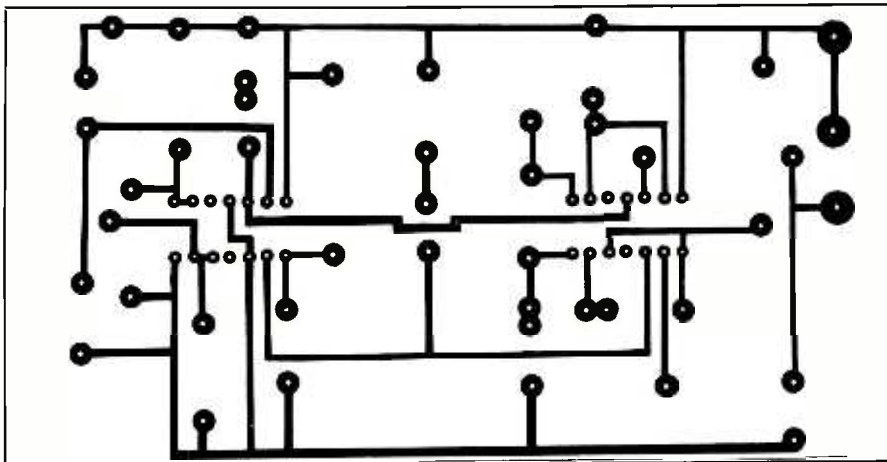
Actual-size etching-and-drilling guide for making pc board.
